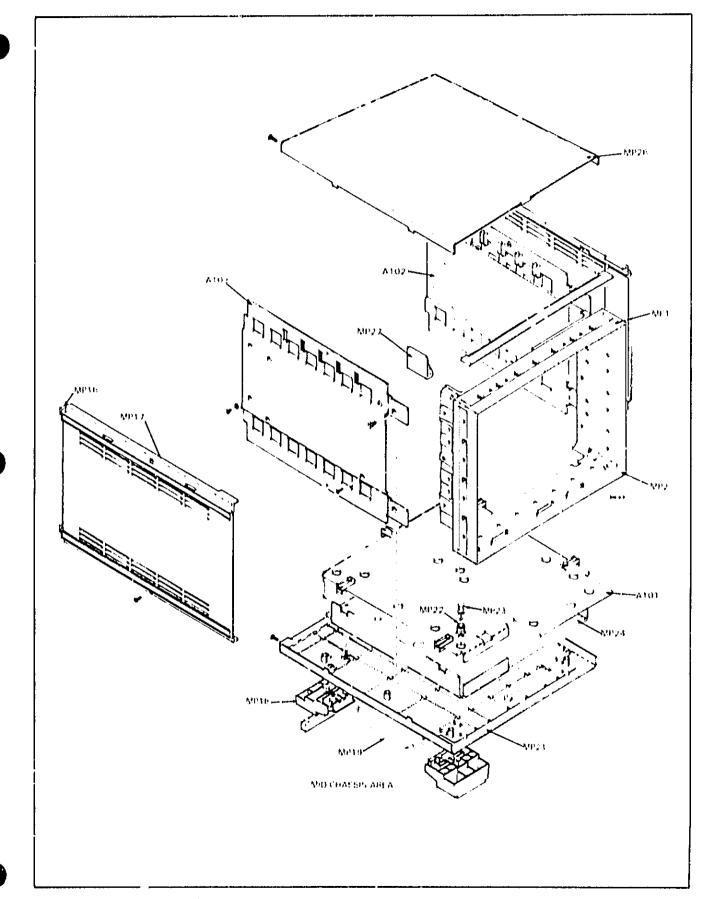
Exploded View, Miscellaneous Parts (Cont'd).
